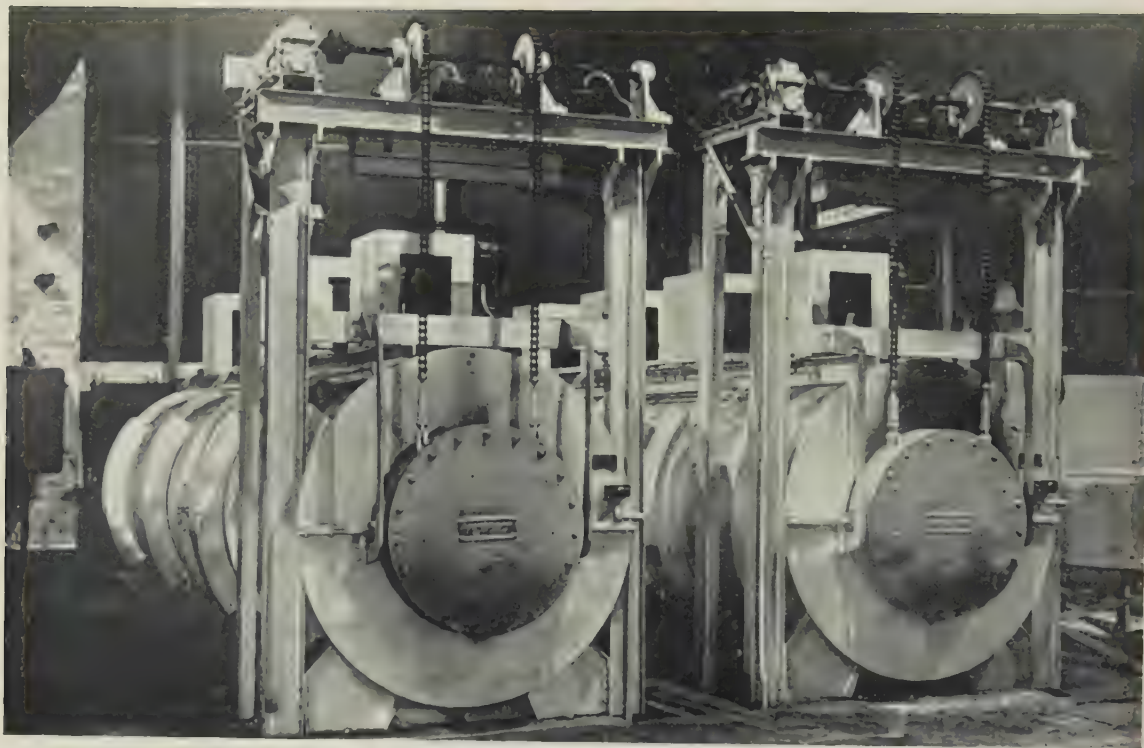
Cylindrical Furnaces for Annealing of Tubes.
